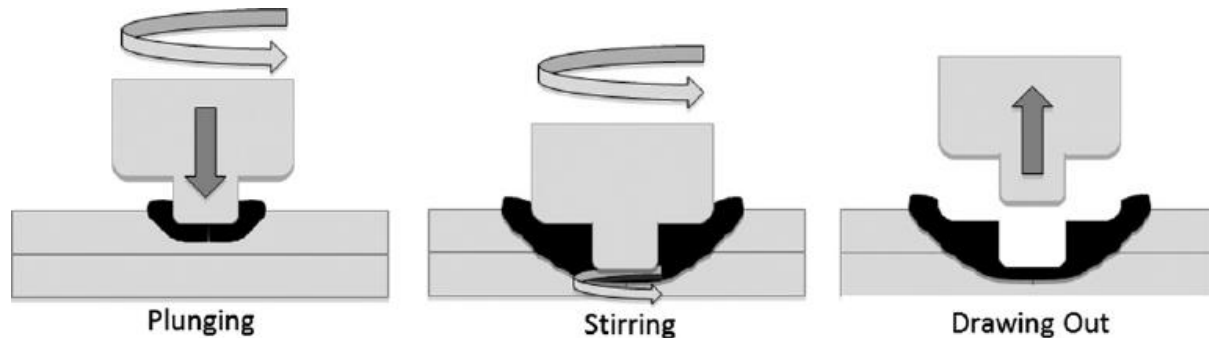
A schematic illustration of FSSW process sequences. (a) Plunging, (b) stirring, and (c) drawing out [Shen et. al., 2013] ^[3]
